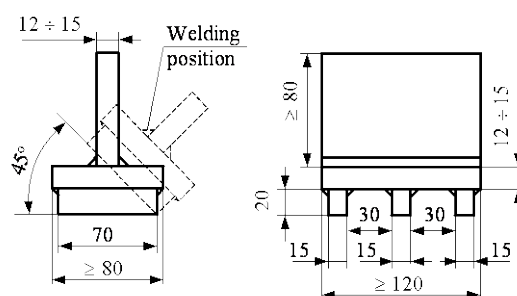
Tee joint for deposited metal hot cracking test
